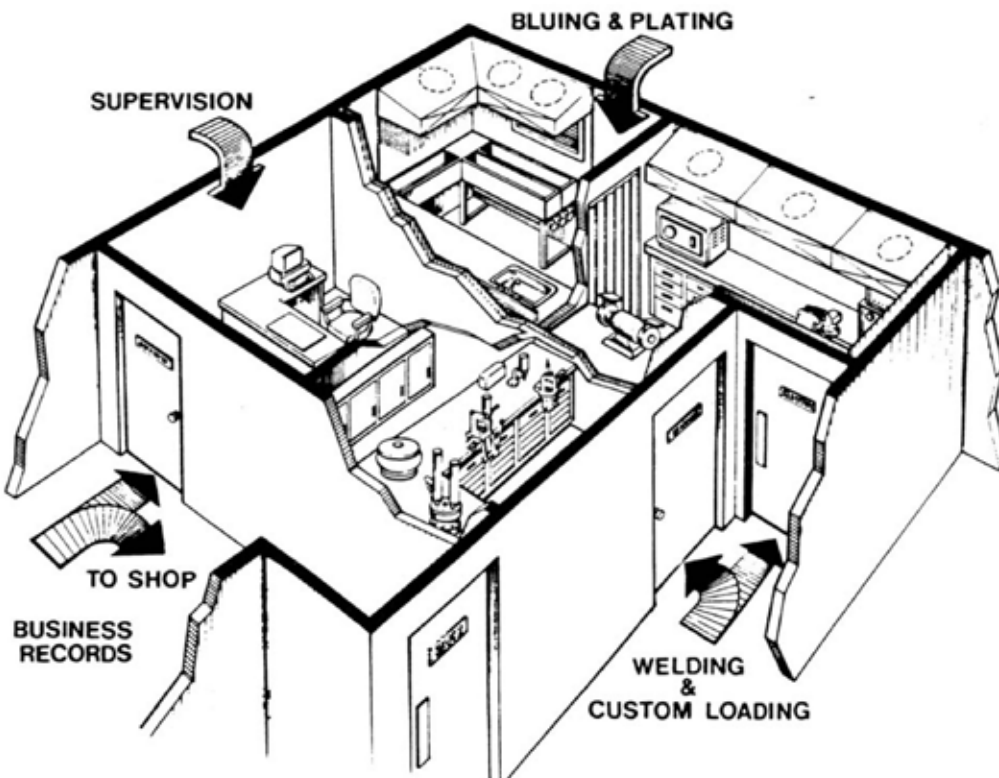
The cutaway view of four important areas in the professional gun shop: business records, bluing and plating, welding, and custom loading.
